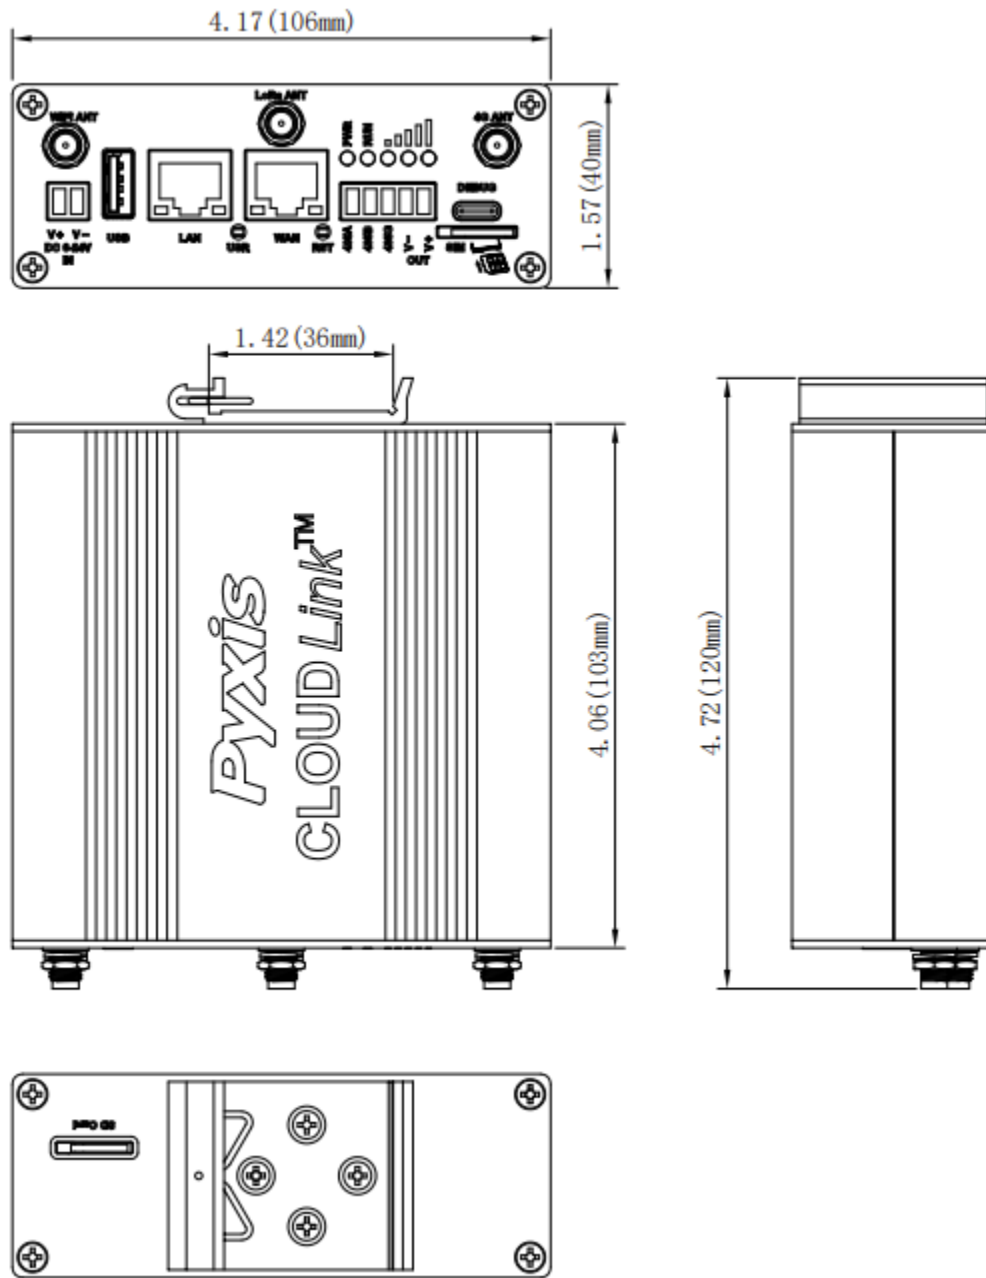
Dimension of CloudLink Enclosure (unit: inch/mm)
